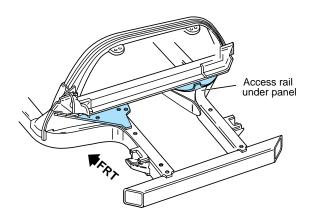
Pry Up Extension Panel for Rail Access
